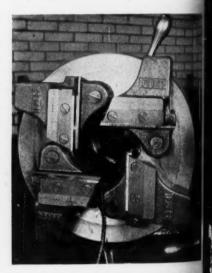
Landmatic Die Head Open After Completing Threading Operation
